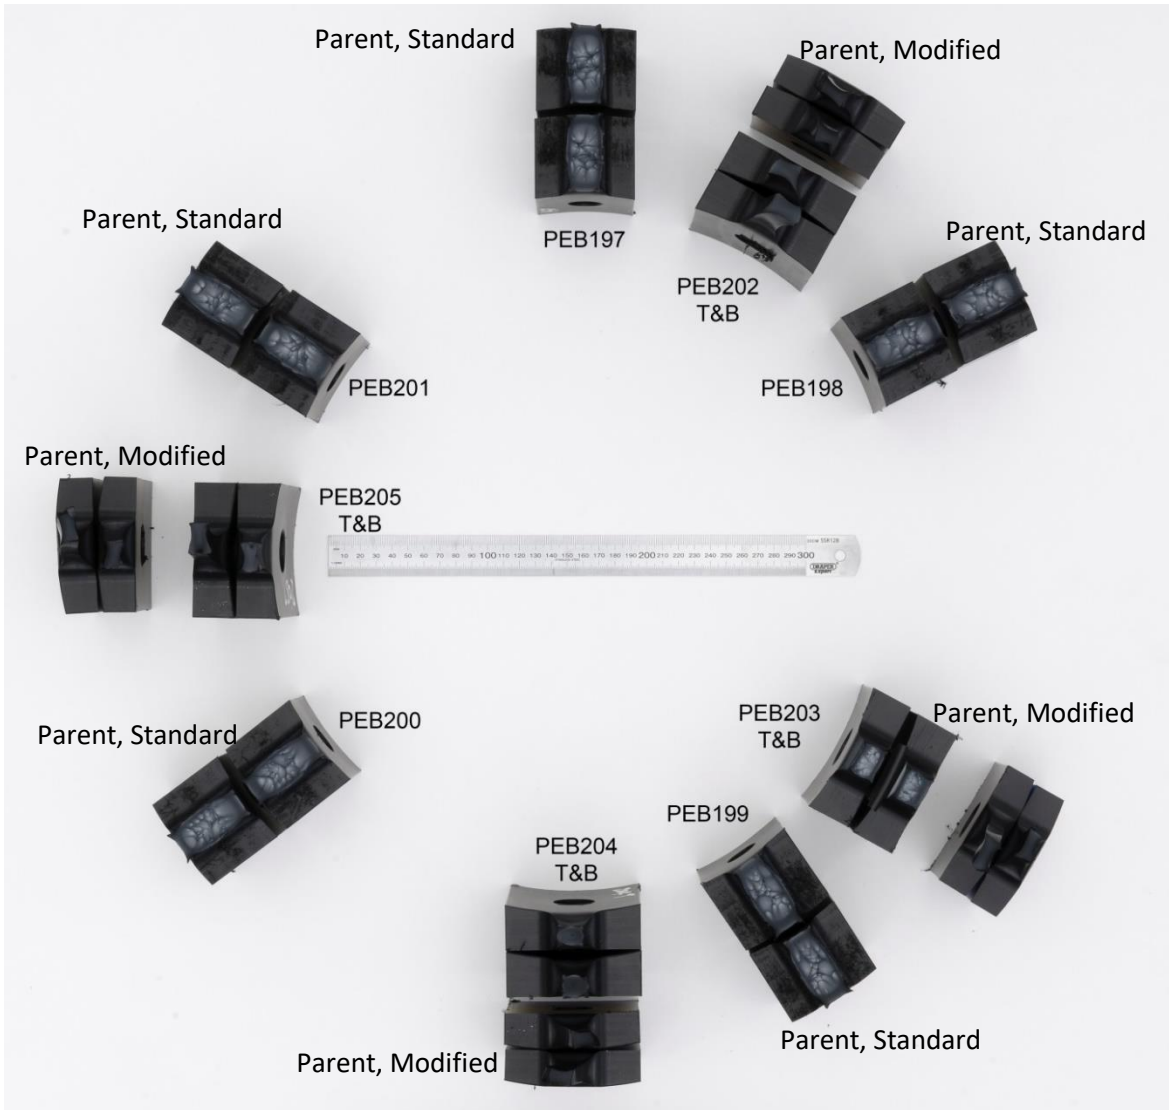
, Fracture surface for parent 500mm OD SDR 11 pipe using standard and modified geometry
